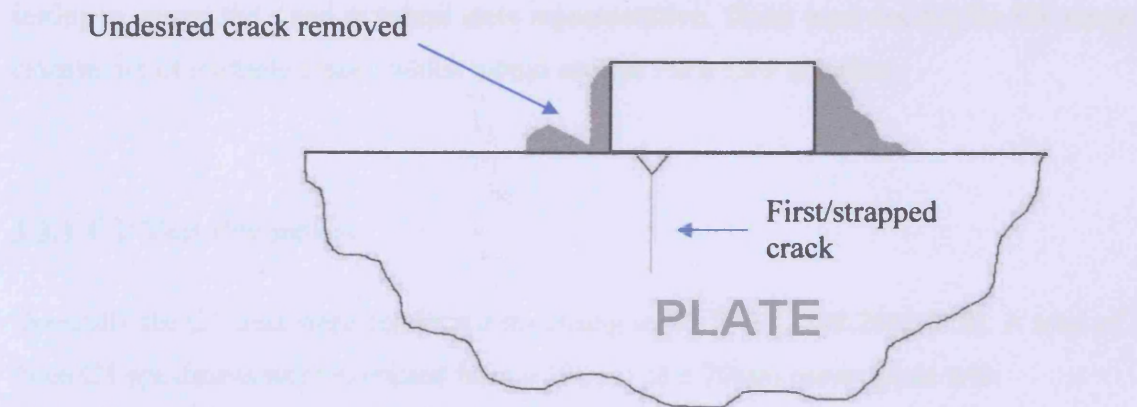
Undesired crack in welded material was removed for re-welding.
